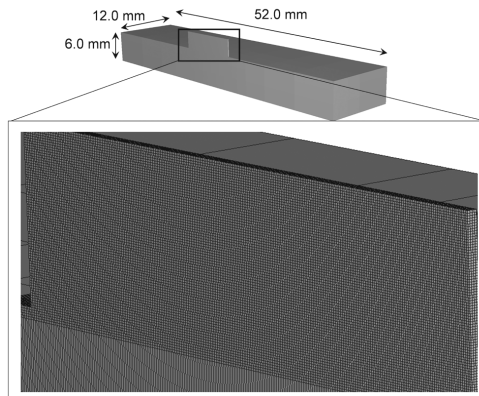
View of the substrate and the wall with a detail of the wall mesh.
